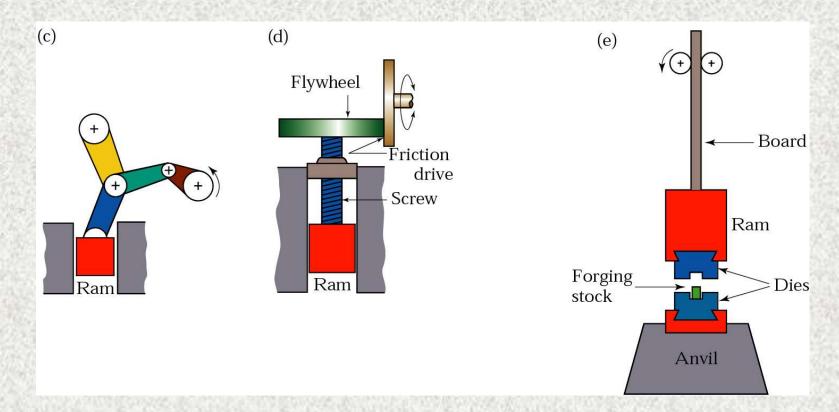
(continued) Schematic illustration of the principles of various forging machines. (c) Knuckle-joint press. (d) Screw press. (e) Gravity drop hammer.
